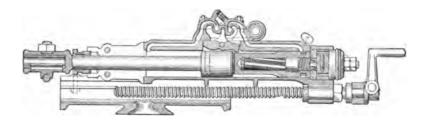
Section of Sergeant "Arc Valve" Tappet Drill.
